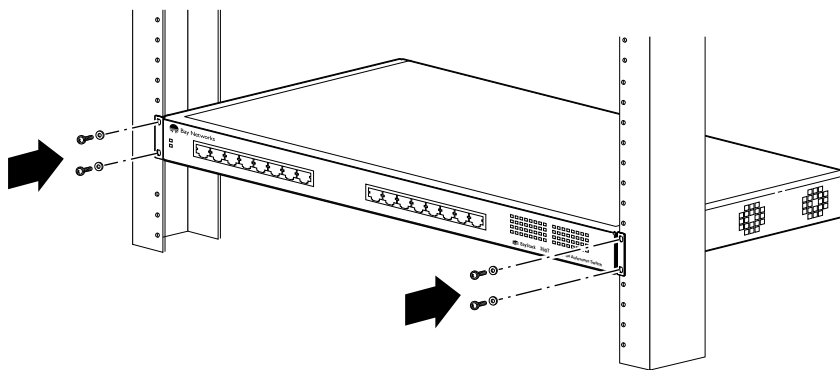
Attaching mounting brackets for a rack mount (standard method)
